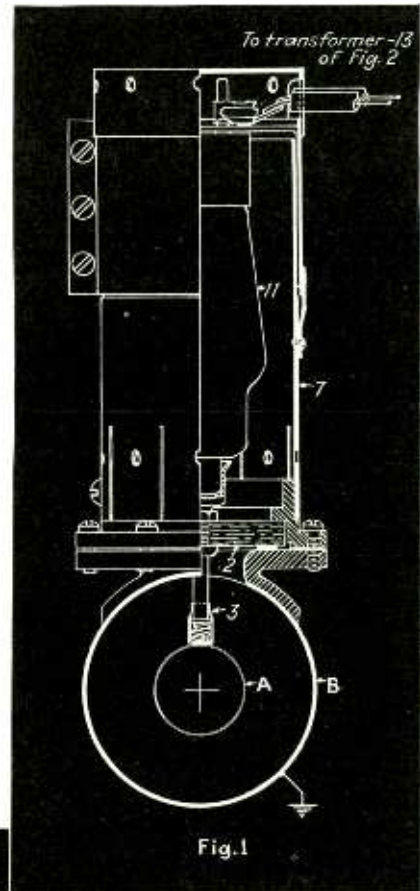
Vacuum tube voltmeter tube unit, showing the rectifier tube and shield mounted on the coaxial transmission line A-B (end view)
